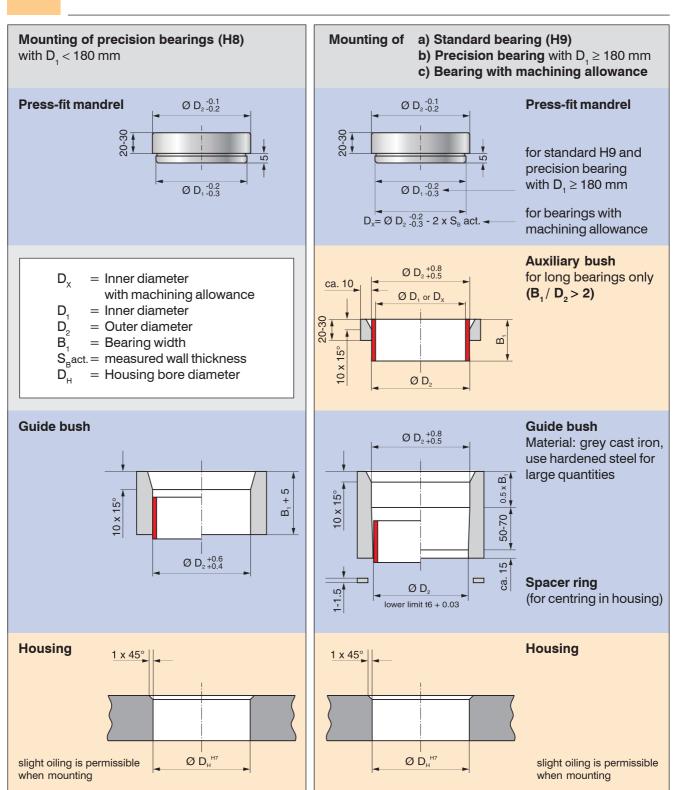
Press-fitting of deva.bm® radial bearings
